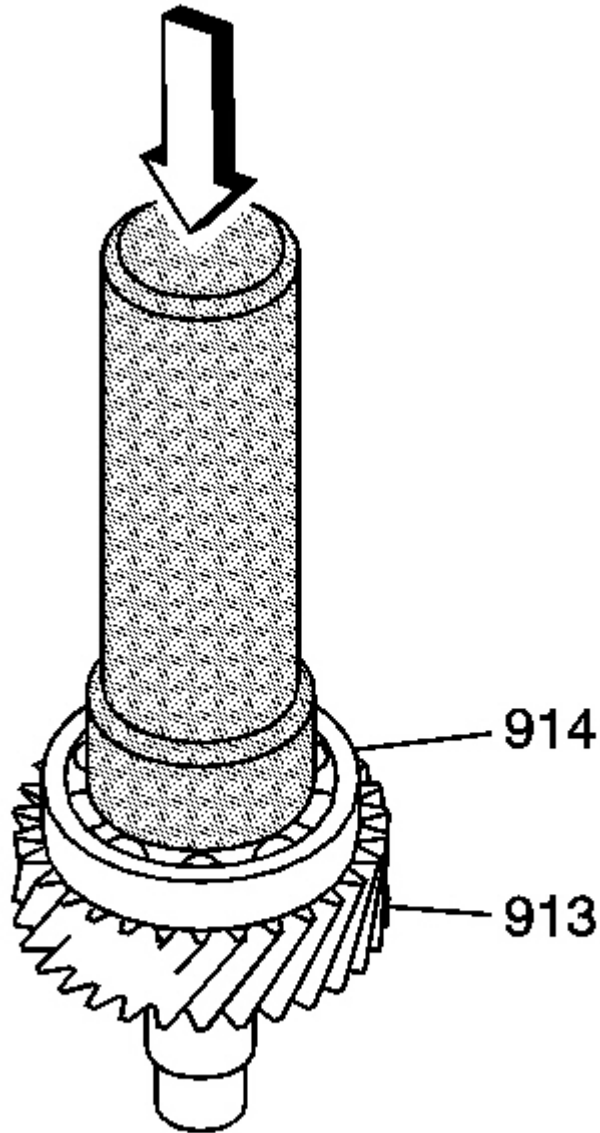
Installing The Transfer Case Input Gear With Shaft Front Bearing Onto Transfer Case Input Gear Using DT 46509
